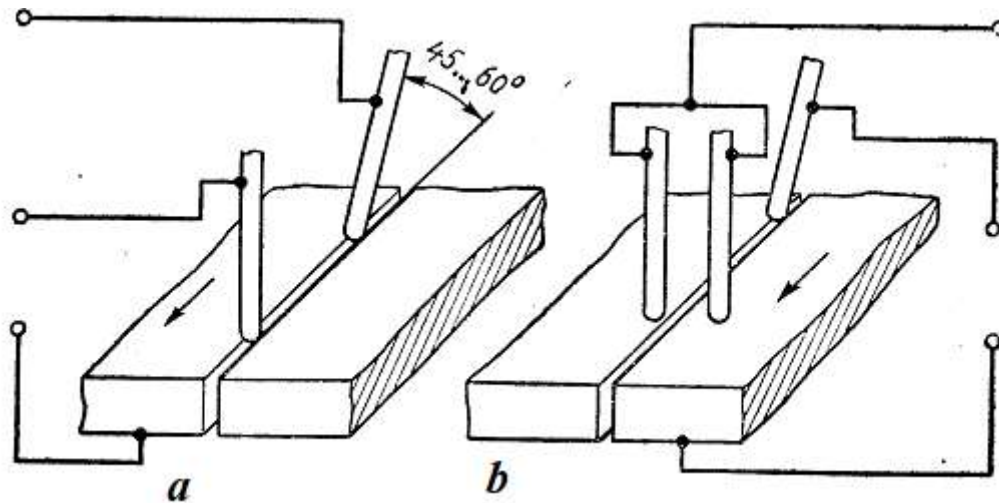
Placement of electrodes when welding at high speeds: *a* – vertical and inclined electrodes; *b* – double vertical and inclined electrodes
